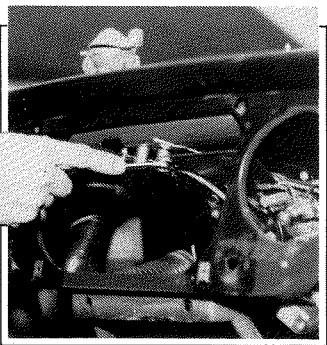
Removing the heater means first removing its ancillaries. Undo the bolts securing the control cables and brackets. These include large spacers, so make a note as to how these are positioned, following the cable down to the heater unit base. Unscrew the cable clip and remove. The heater valve control is identical and can be removed at the same time.
